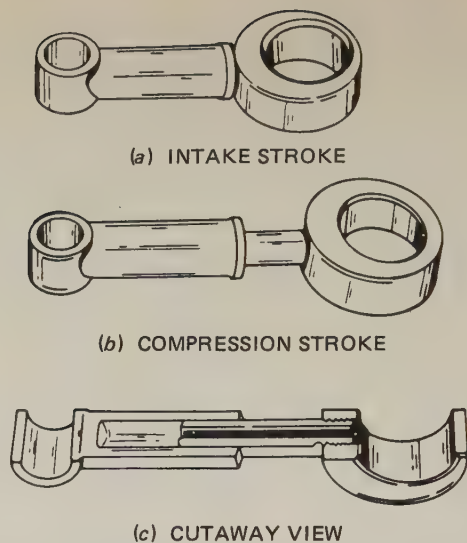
Barrel-type lubricating pump used on the Lauson vertical-shaft engine.
